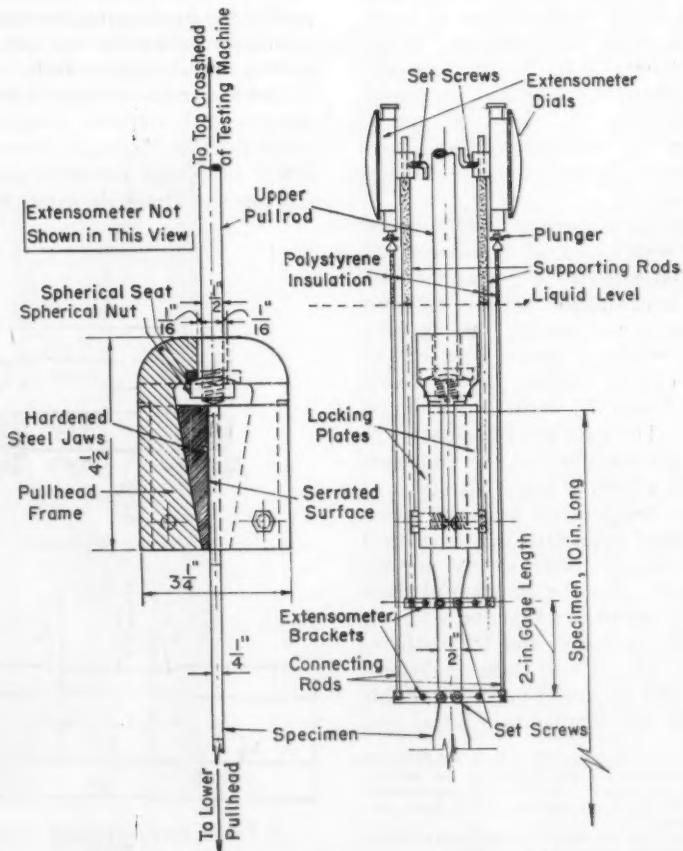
Pullhead, Specimen, and Extensometer Assembly for Tests at -321 F.
